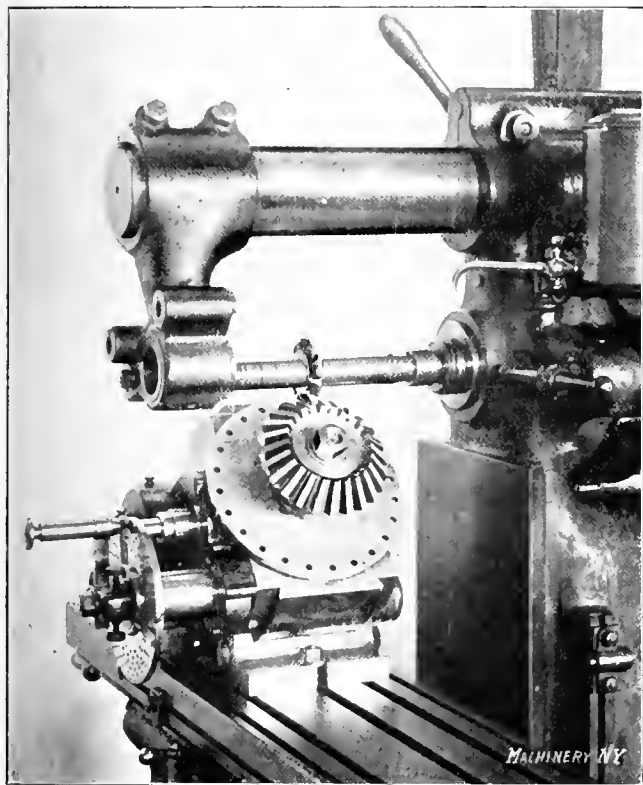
Milling Machine set up for Cutting a Bevel Gear
